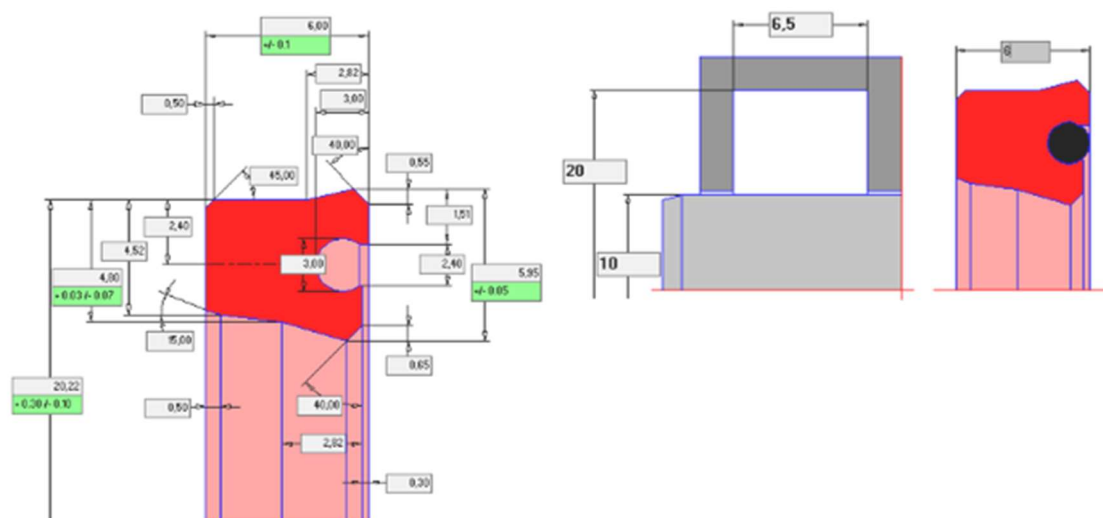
S3 Technical Sheet by Otto Olsen [46]
